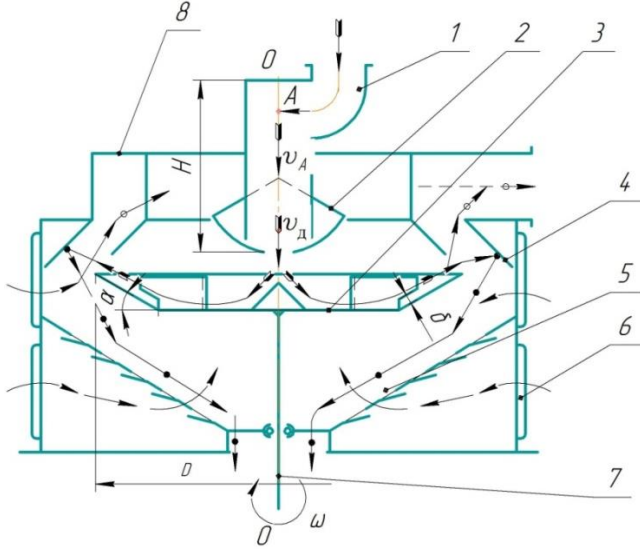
Principal scheme of pneumoviral device [15, 16]: 1 – loading grain lines; 2 – dosing device; 3 – rotary spreader of grain mixture; 4 – the wall of the air channel; 5 – louver cone; 6 – louver cylindrical wall; 7 – separator rotor shaft; 8 – is a casing
